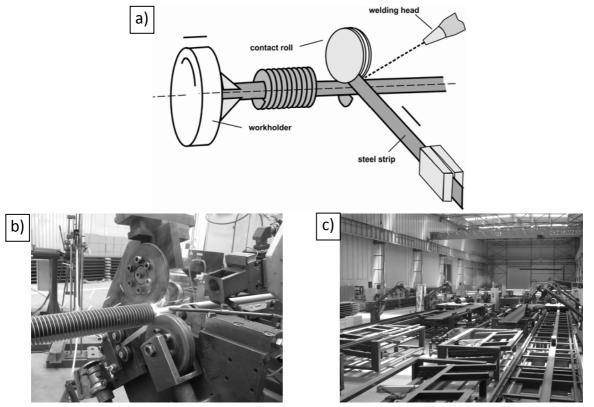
Laser welding station finned tubes developed Energoinstal SA: a) general scheme of the welding, b) running back position, c) general view of the position
